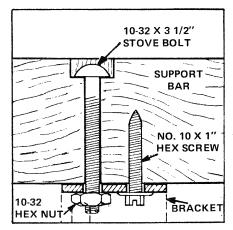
B Cross-section view of mounted Bracket (on BOTTOM of the Bar).
